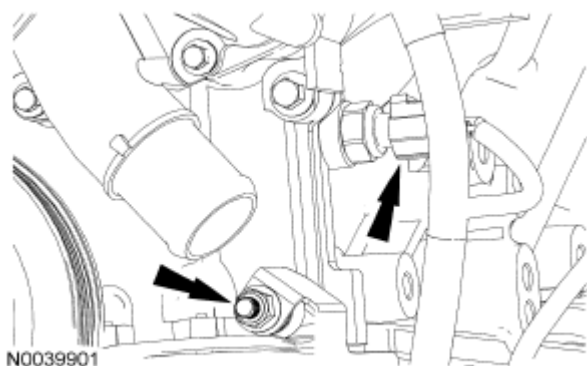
Identifying Oil Pressure Switch Electrical Connector And Nut
